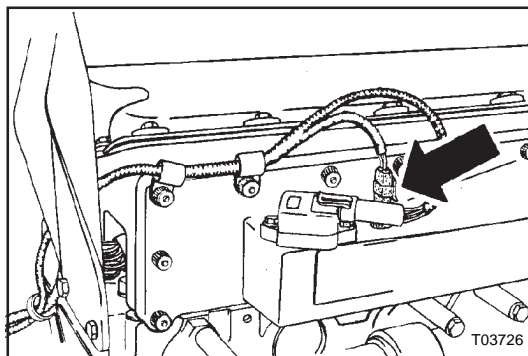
Intake manifold air temperature of Cummins engine fuel system (drawing shows M11+ engine)
